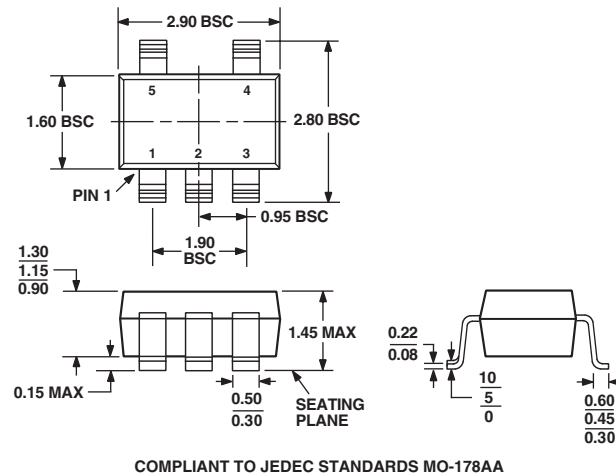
5-Lead Small Outline Transistor Package [SOT-23]
